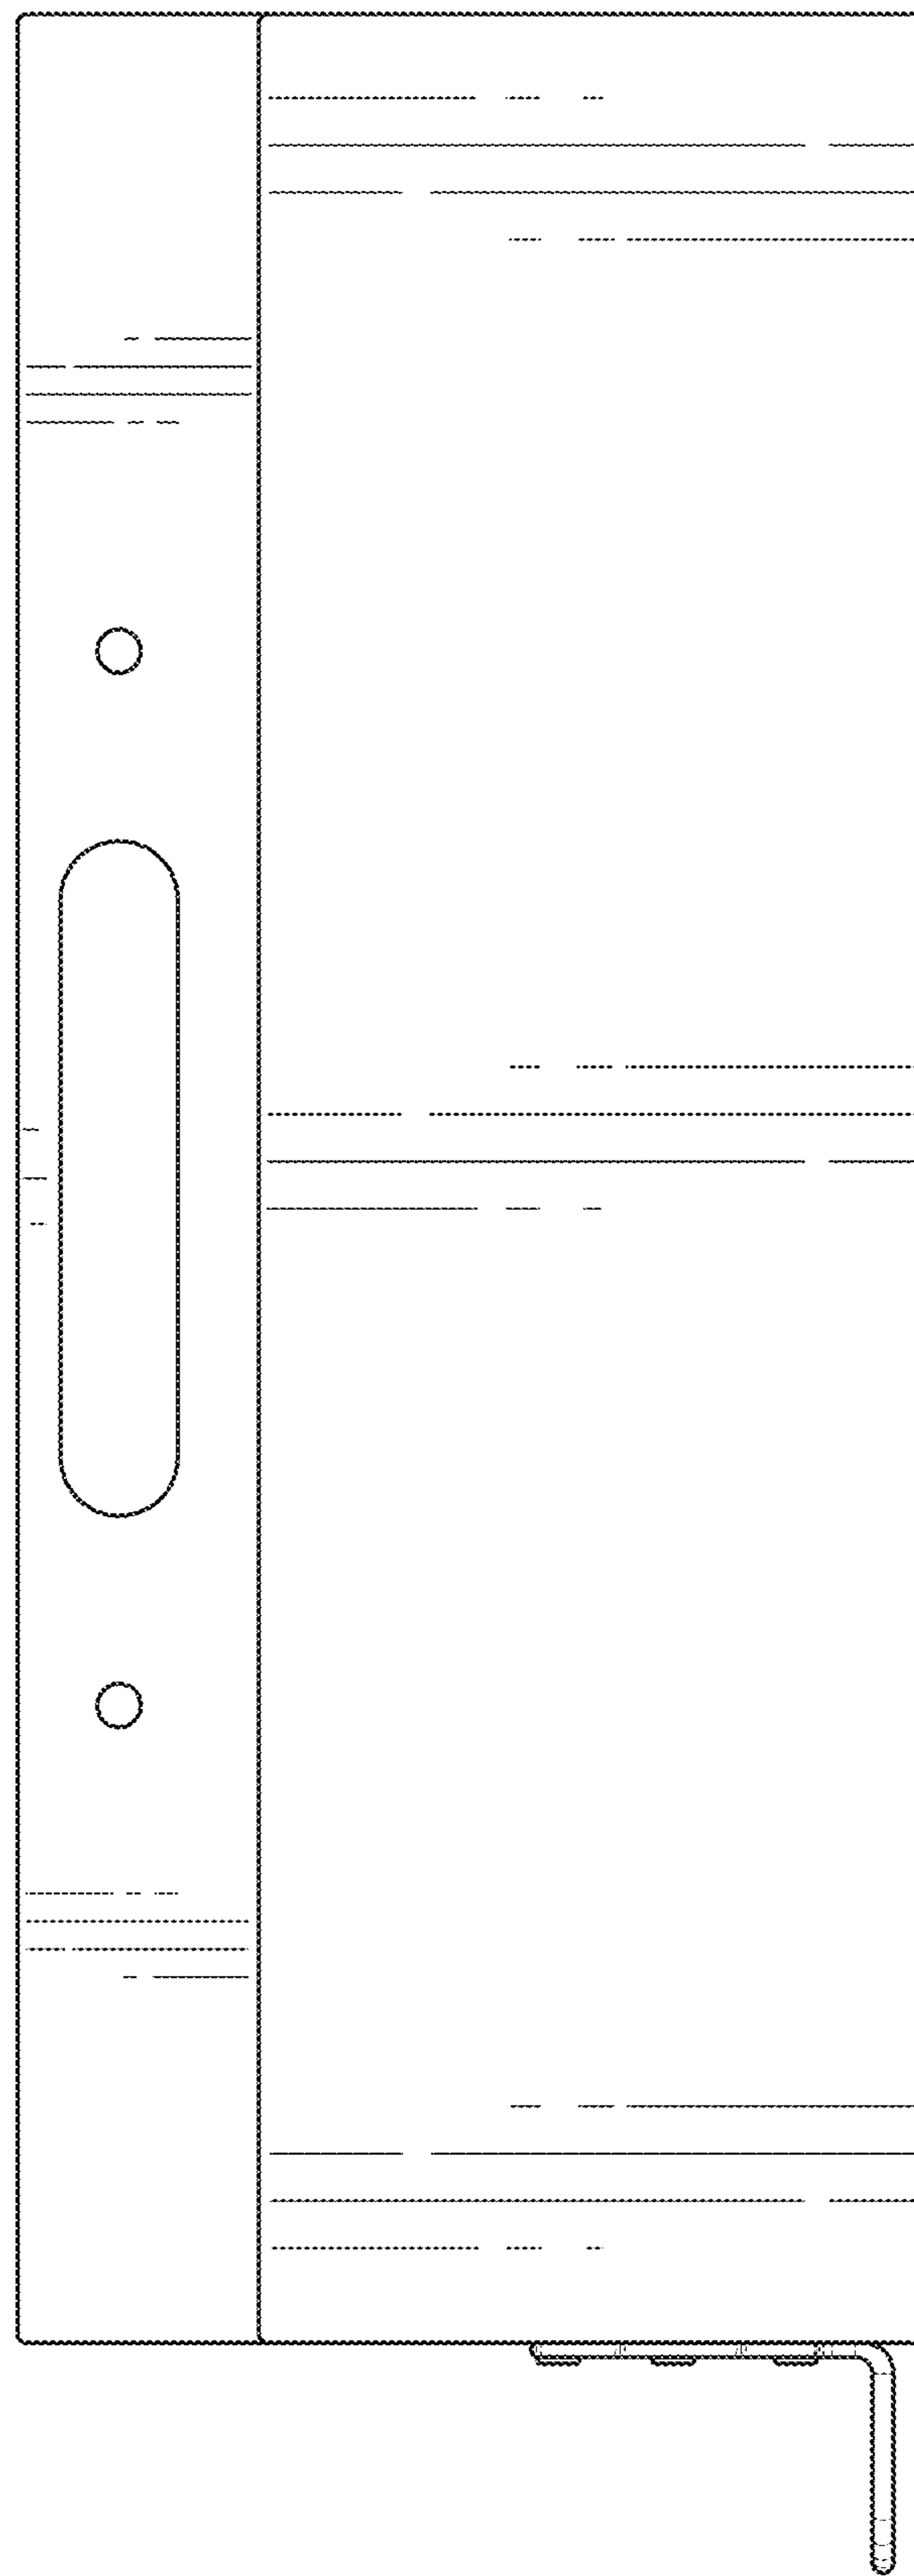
is a top plan view in elevation of the ladder tool caddie of FIG. 1.
